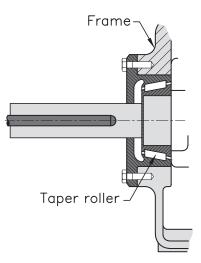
Schematic diagram showing the main bearing mounted directly in the frame. Courtesy of Ingersoll Rand Company.
